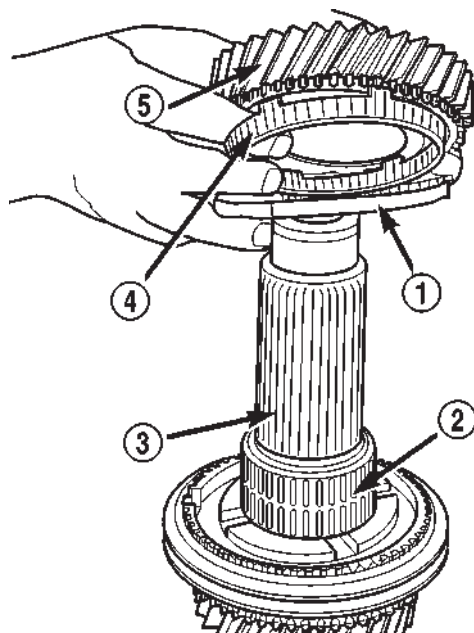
FIFTH COUNTERSHAFT GEAR
